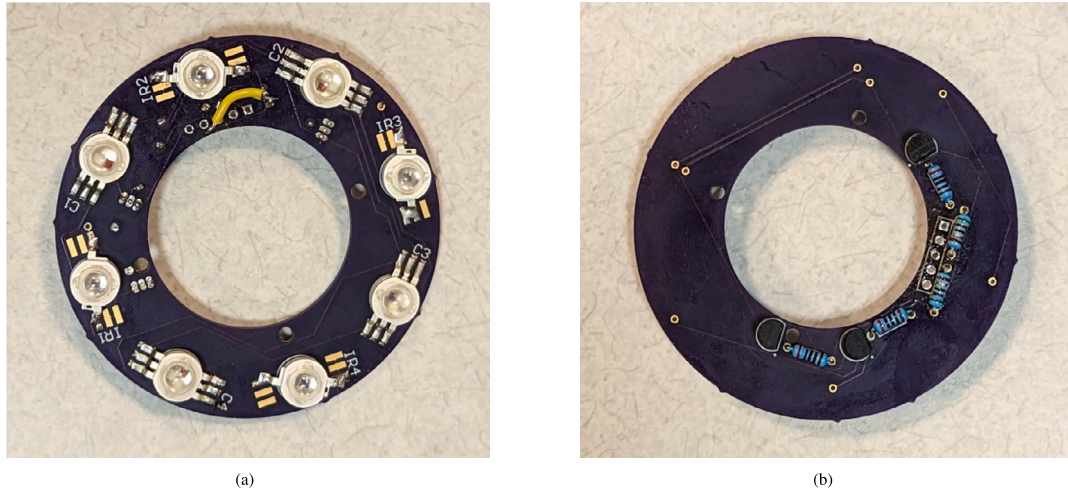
Views of the Lighting PCB showing all lighting components. The front of the PCB (a) contains the circular alternating arrangement of NIR and RGB LEDs. The back of the PCB (b) contained the MOSFET transistors used for switching and other passive components used for current regulation.
